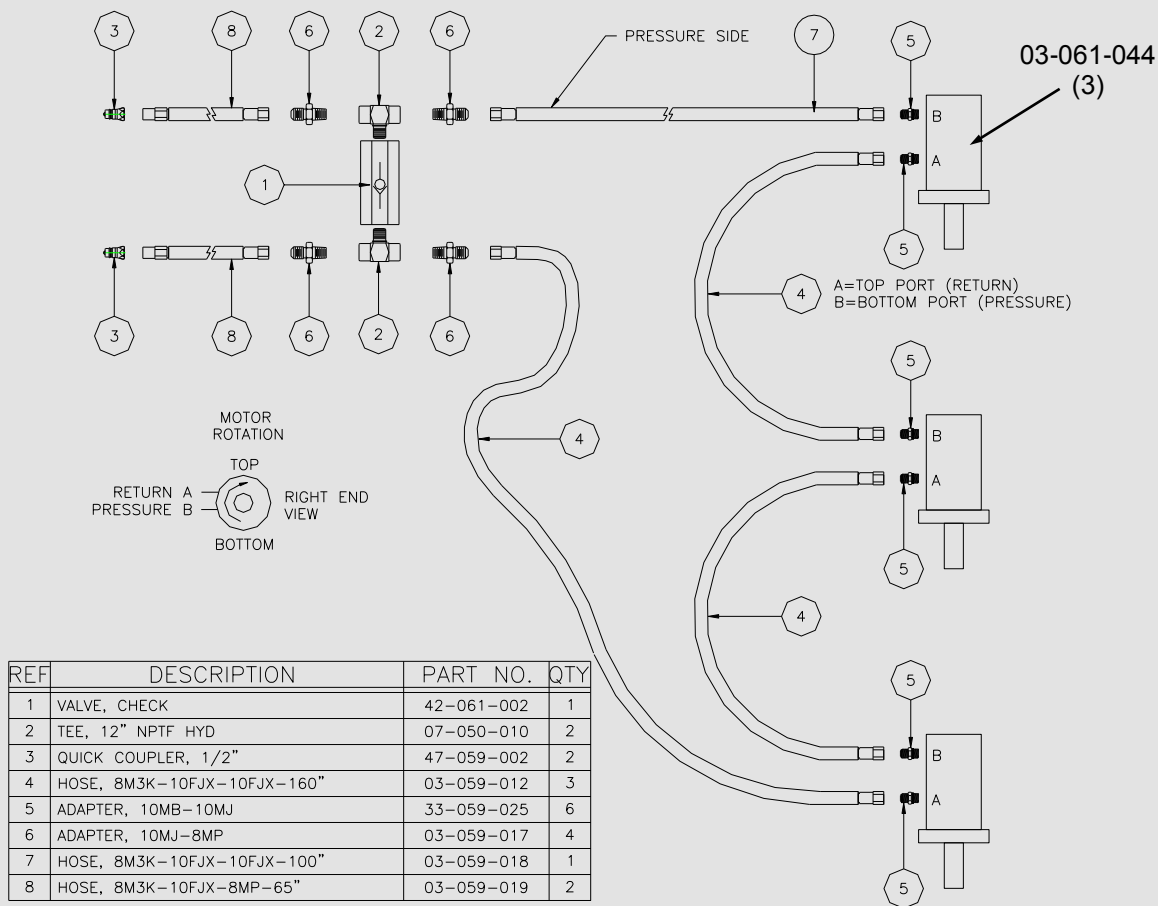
(6R Hydraulic Schematic) (For Machines Prior to 2009)
